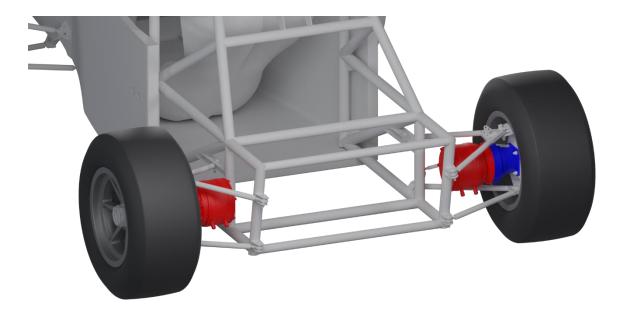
Illustration of formula student vehicle with hub motor configuration, showing motors (red) and gearboxes (blue).
